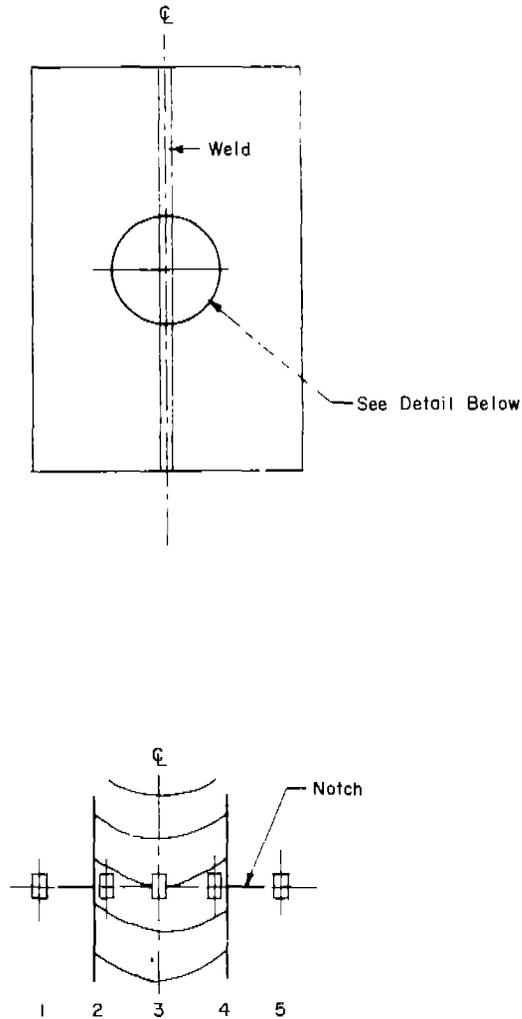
Details Of Strain Gage Locations For 24-In. Wide, Welded Plates.
